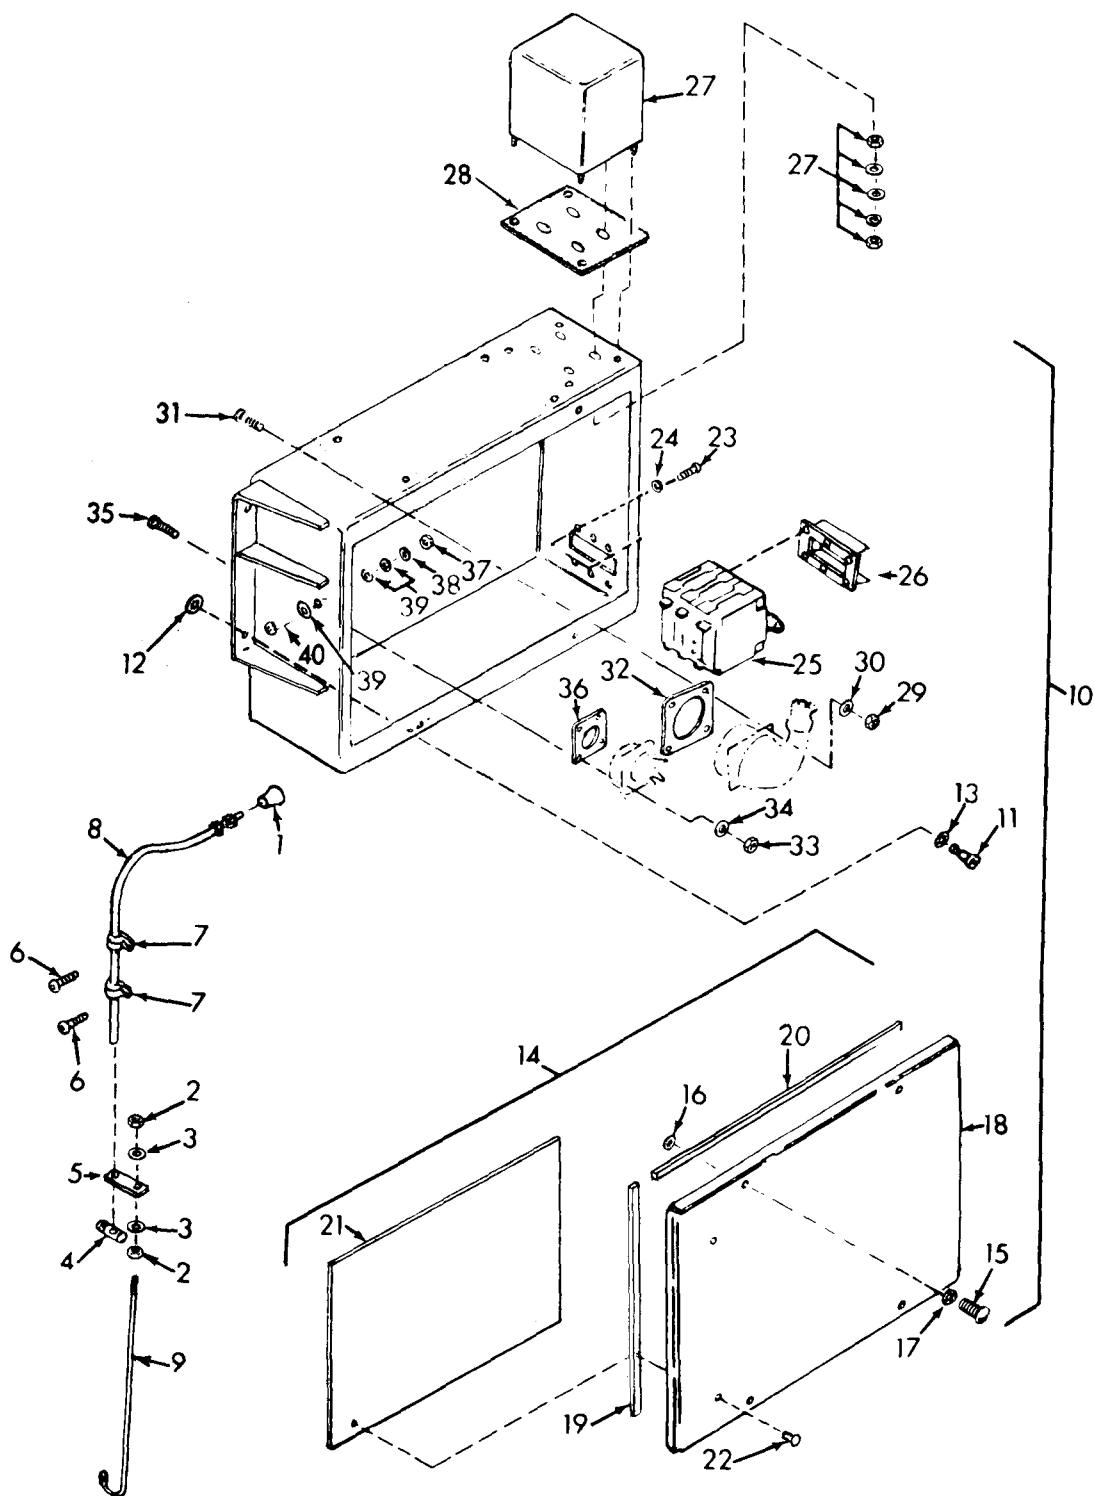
Junction Box Assembly (Sheet 1 of 3)
